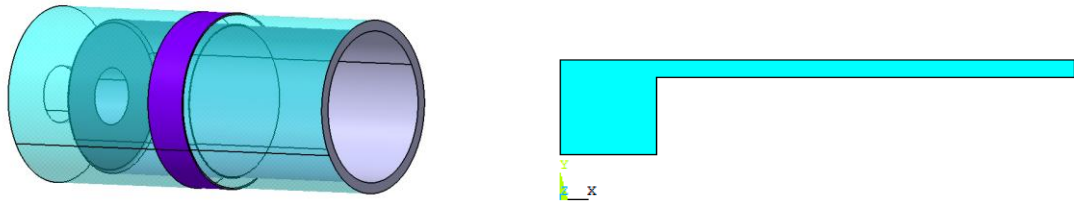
Side view of the vessel with important dimensions and the location of circumferential weld.
